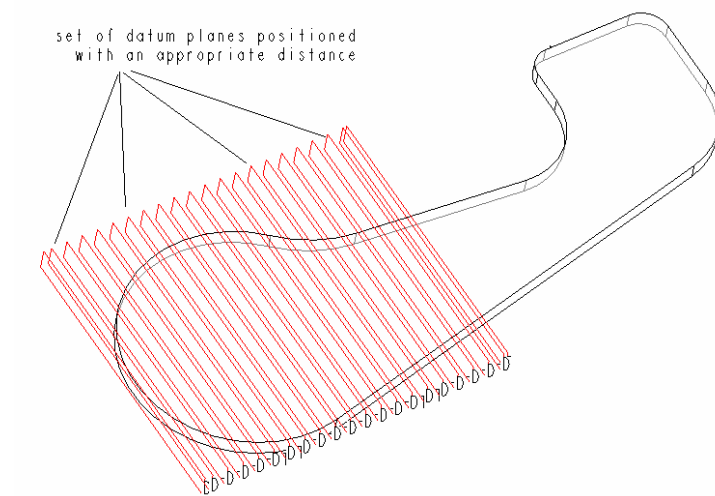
Datum Planes Constructed on an Example Wireframe Model [22]
